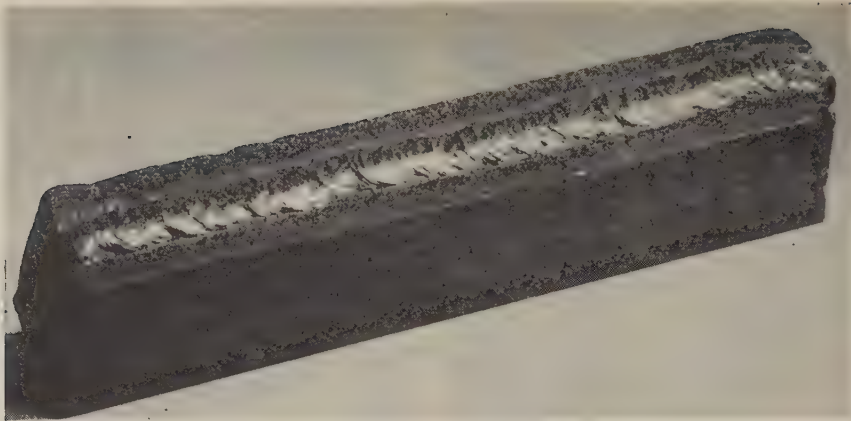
WELD-BEAD SPECIMEN FOR GRAPHITIZATION TEST
